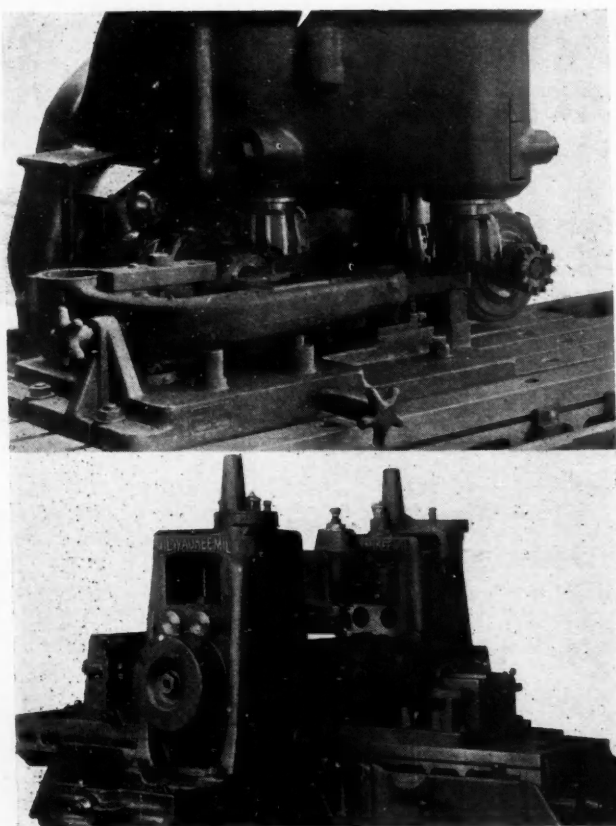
(below) The equipment pictured is used for milling both ends and magneto pad of a tractor engine
